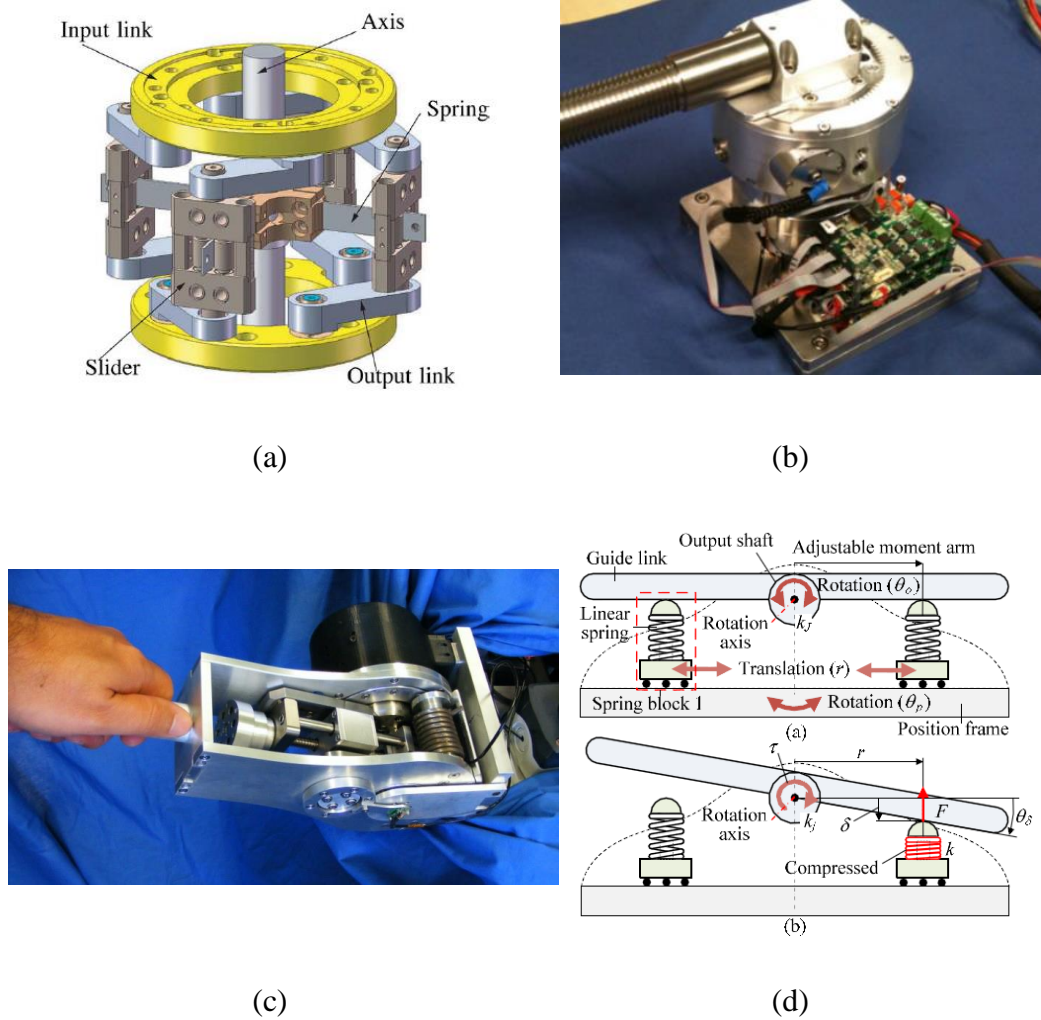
(a) CAD drawing of variable stiffness joint using leaf spring [62]; (b) CompAct-VSA [64]; (c) AwAS-II [65]; (d) working principle of HDAU [66]
